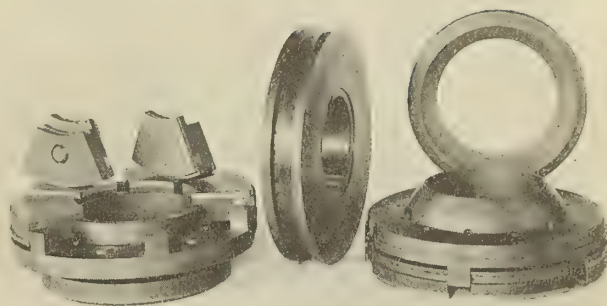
Parts of Kingsbury Propeller Thrust Bearing
